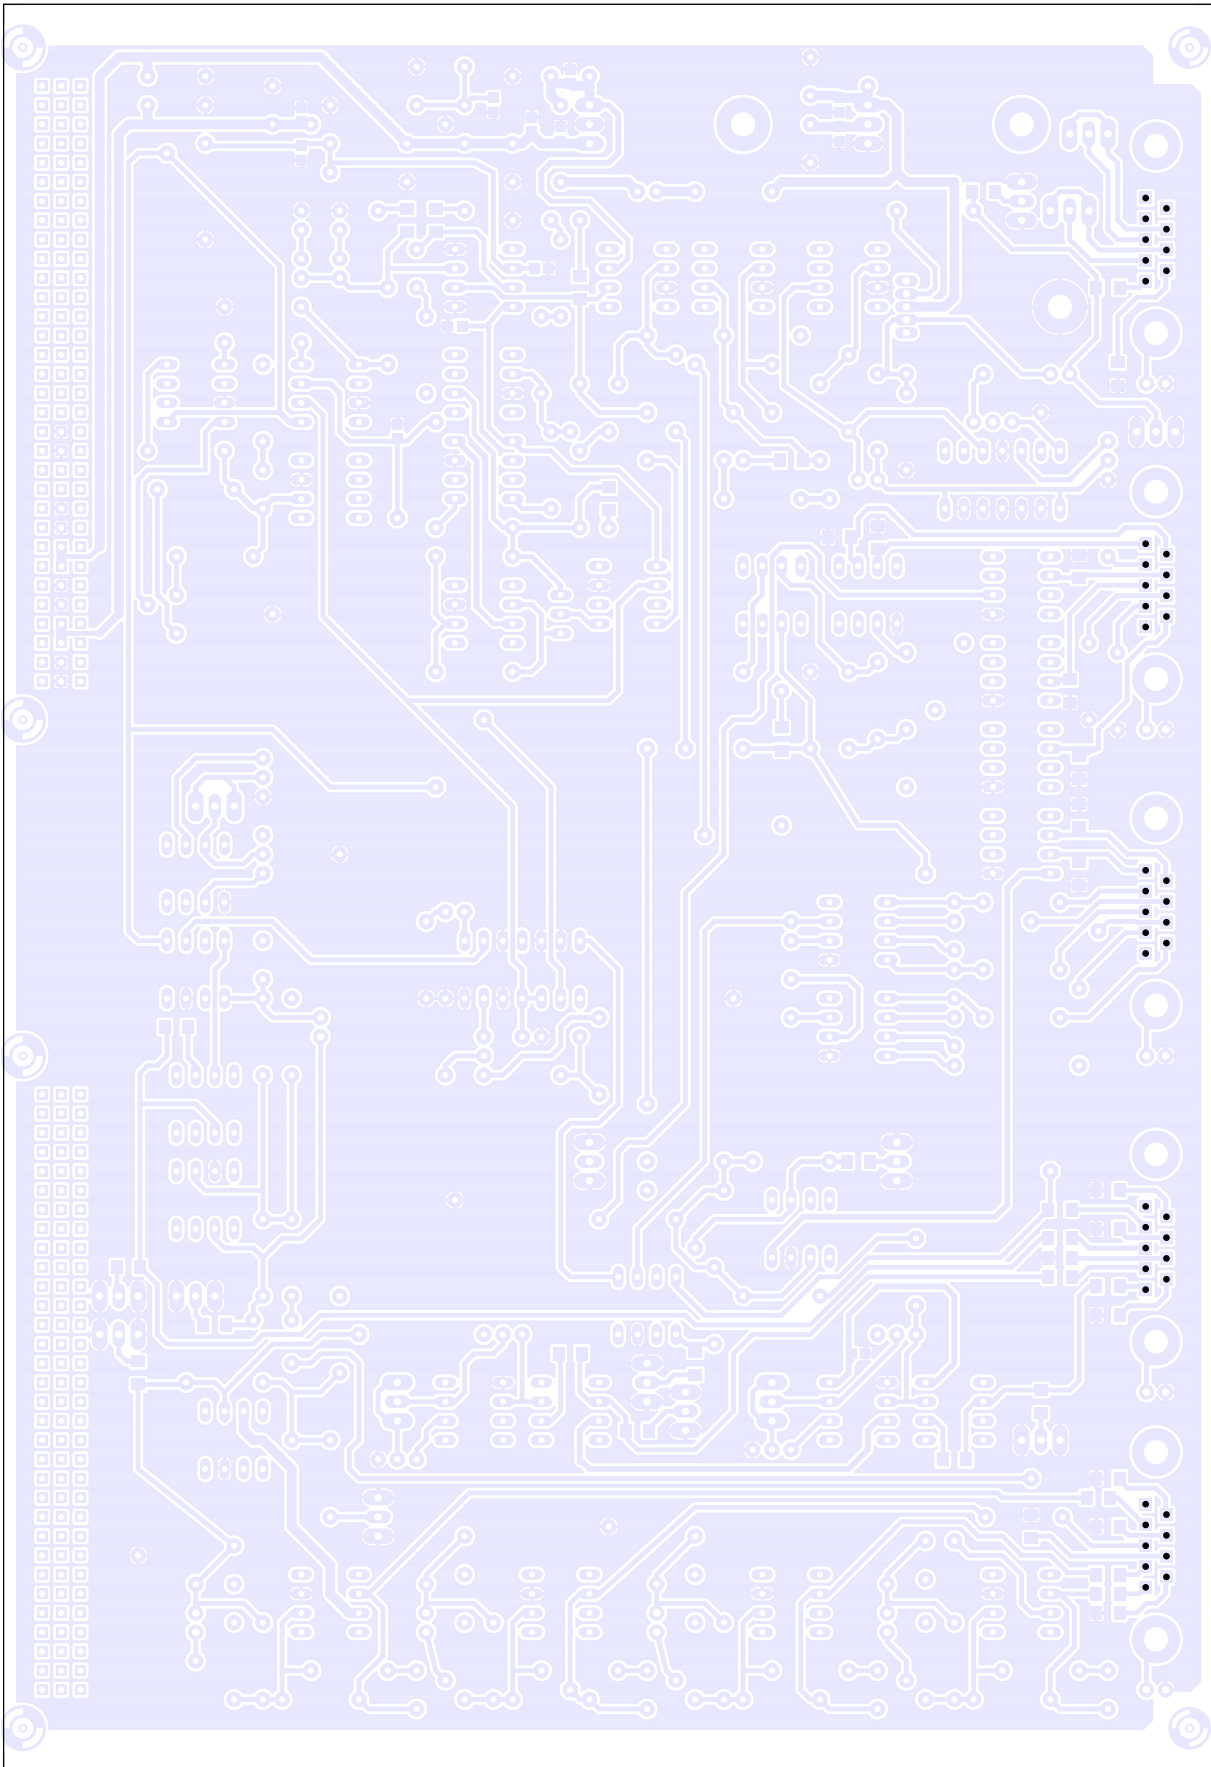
Board bottom view showing drills with 0.9 mm (0.035 in) diameter
